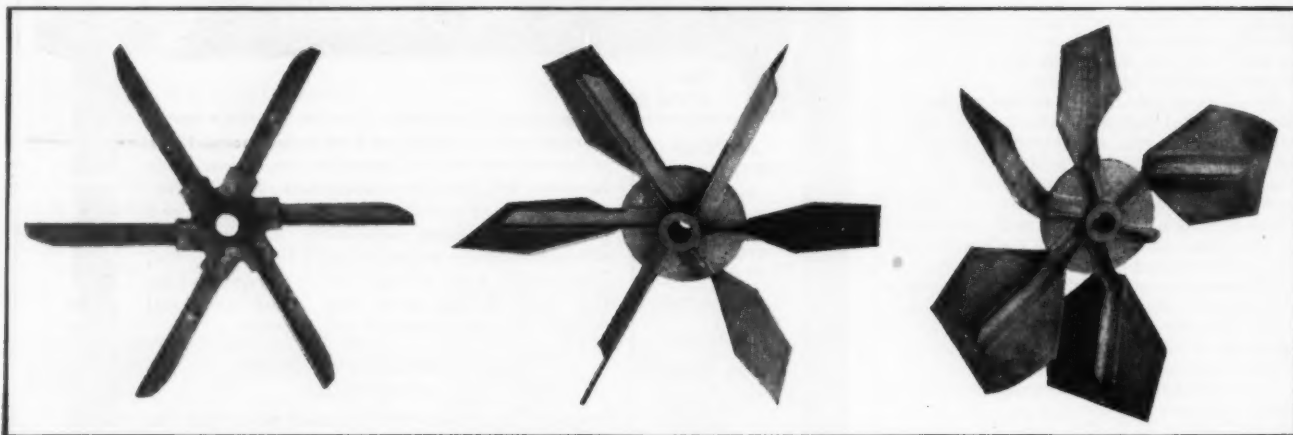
Original construction. Riveted steel blades cast in iron hub. Cost approximately 25¢ per pound including riveted blades.
